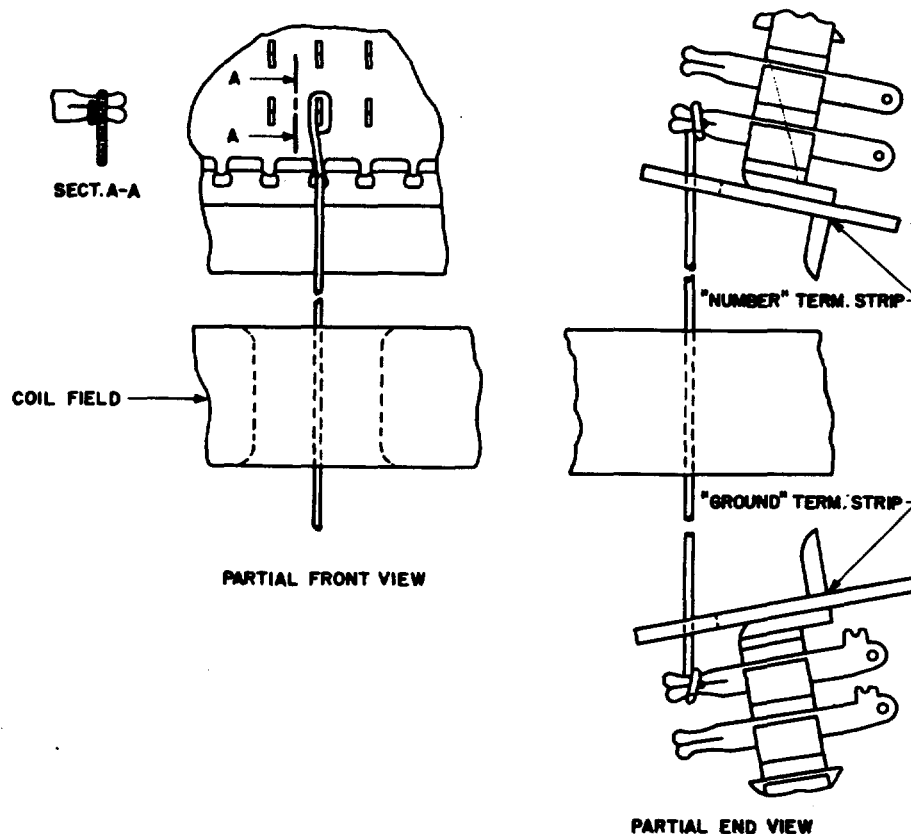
METHOD OF CONNECTING WIRE TO
